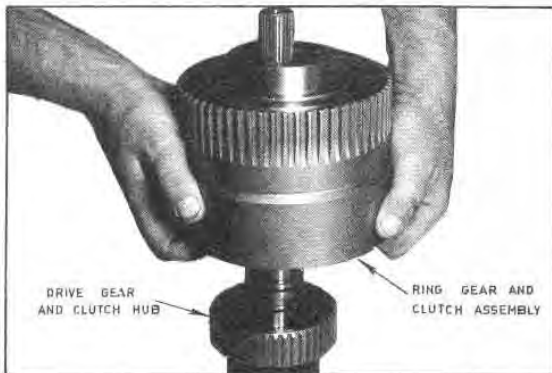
Installing the Ring Gear and Clutch Assembly on the Drive Gear
